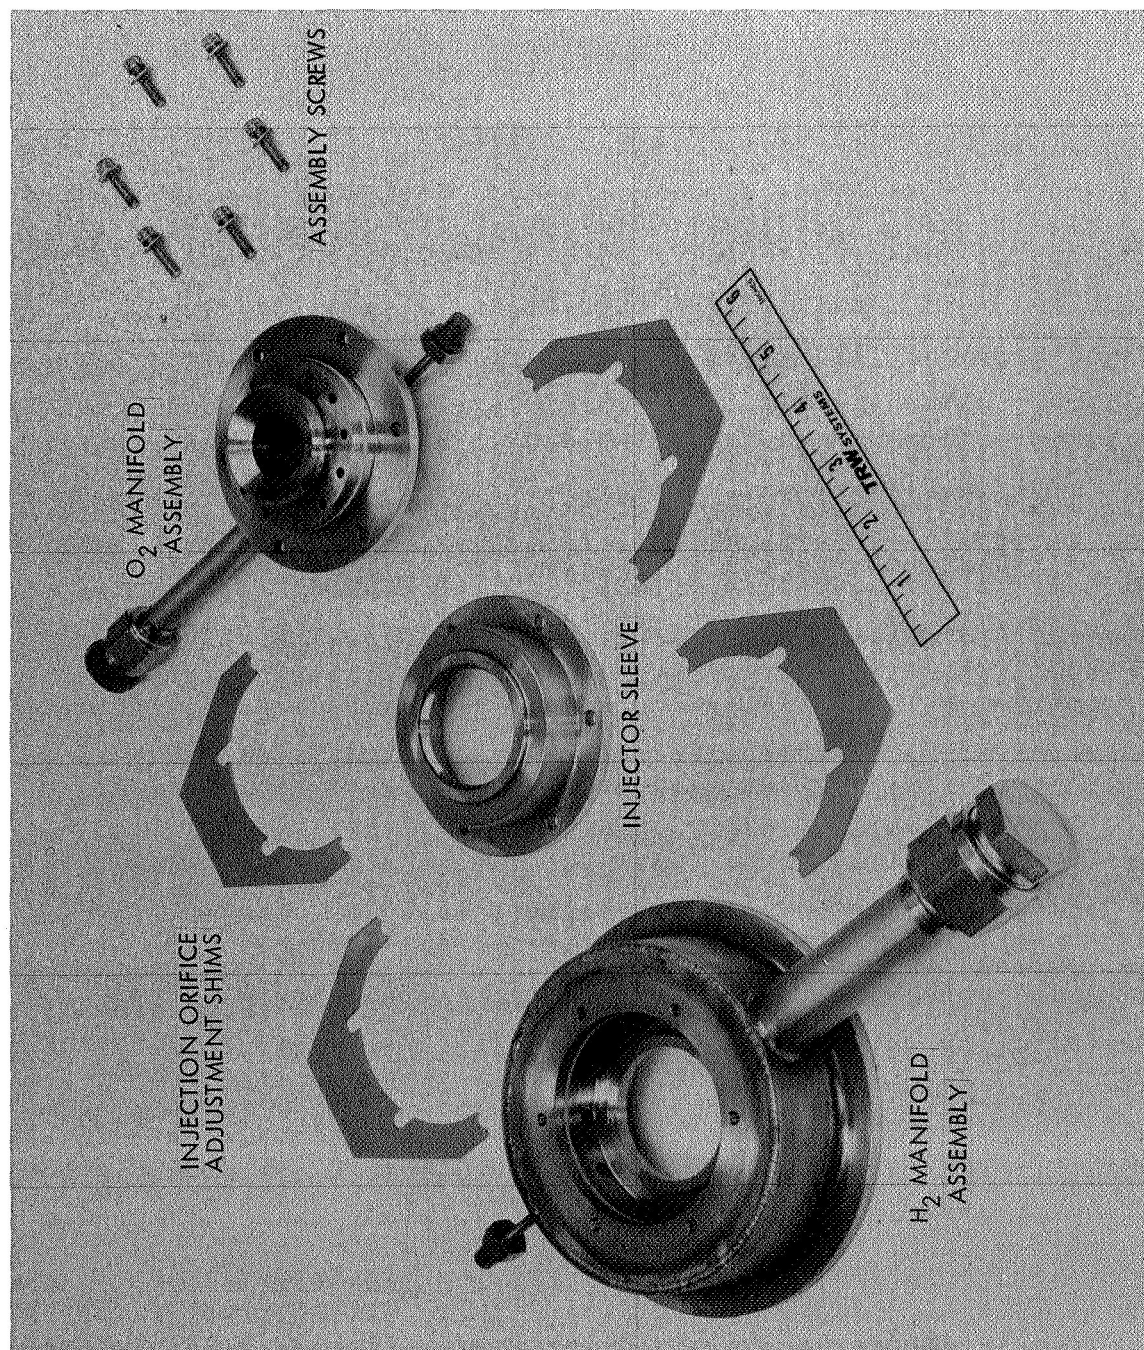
Disassembled Injector – Low Chamber Pressure Thruster
